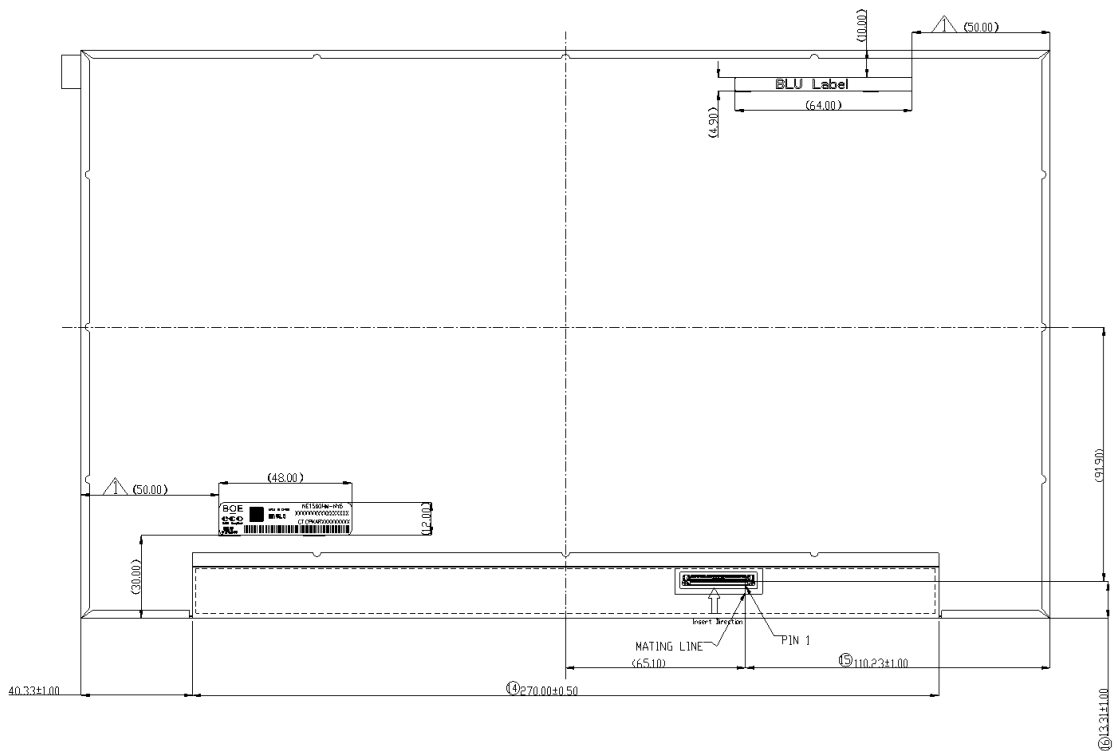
TFT-LCD Module Outline Dimensions (Rear view)
